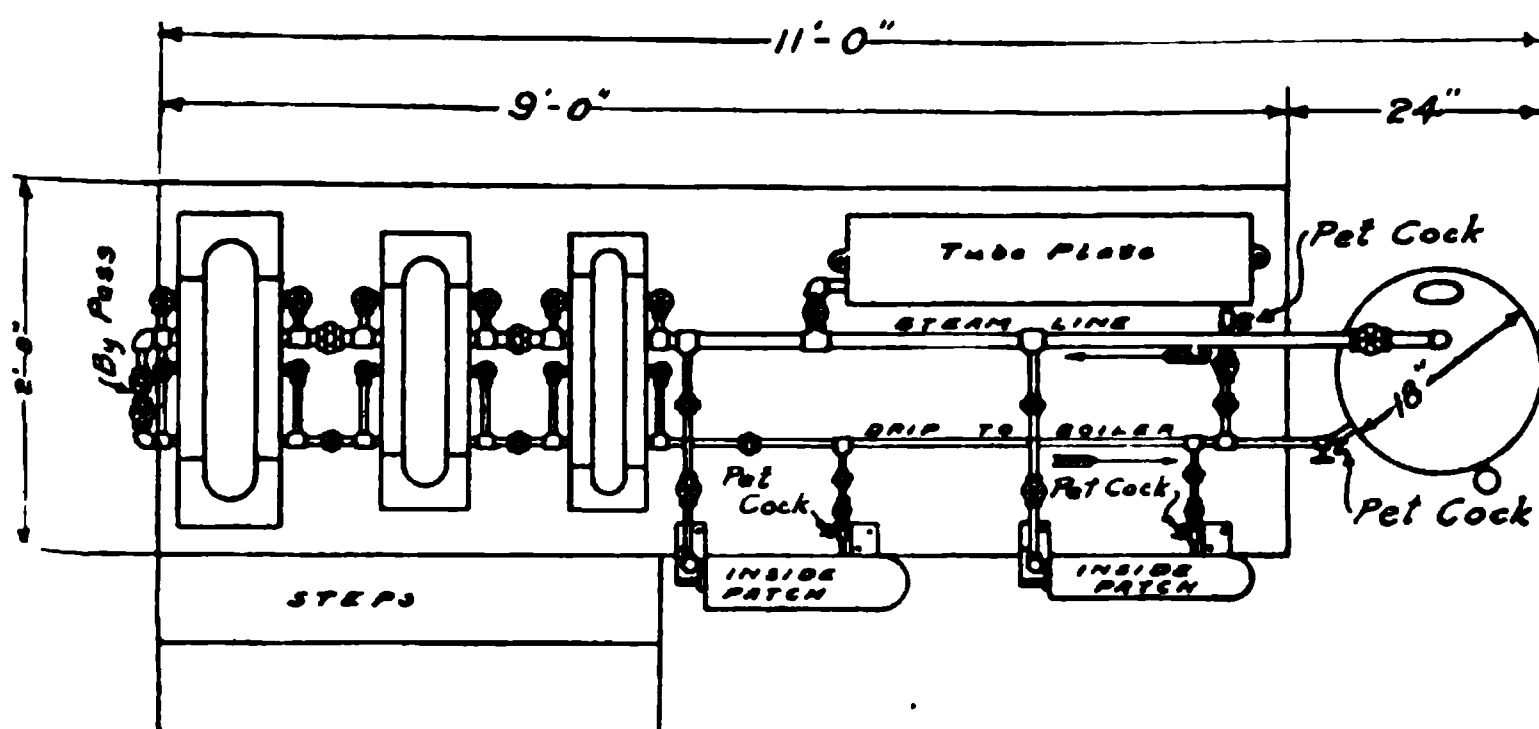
Plan View of Gravity-Return Vulcanizing Plant
